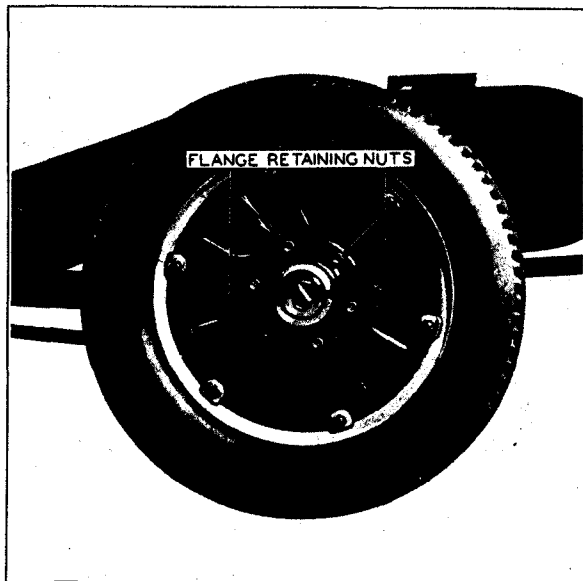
View of Rear Wheel Showing Nuts Which Hold Axle Shaft to Wheel
